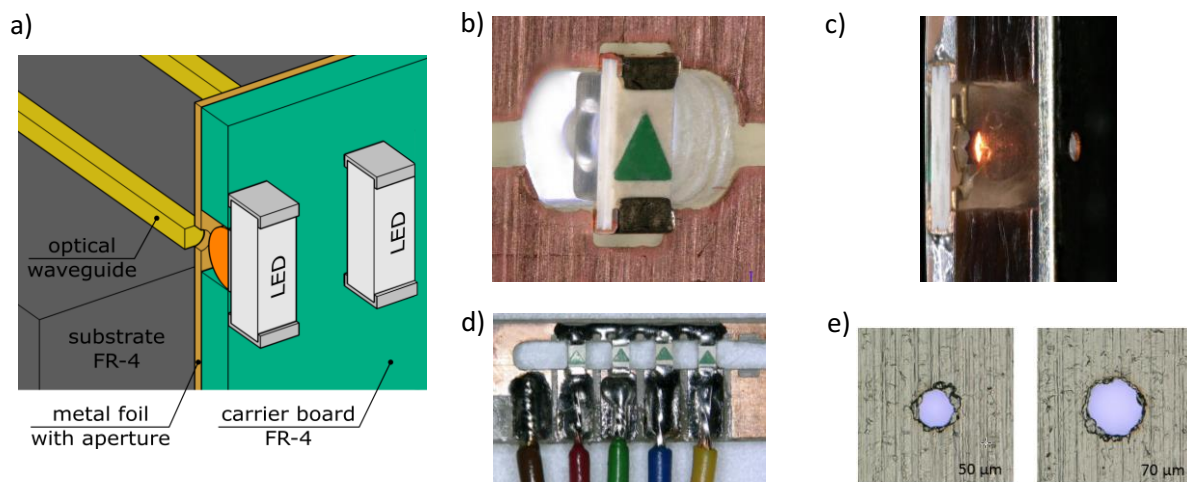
a) Schematic drawing of multiple LED modules coupled to a waveguide array; b) reverse mounted LED in a milled opening of the carrier board with solder pads; c) cross section of an emitting, soldered and glued LED-module aligned to the $\text{\O}50\ \mu\text{m}$ circular aperture in a steel foil; d) LED array with colors red, green, blue, yellow; e) microscope images of laser-cut apertures with diameters of 50 and 70 μm in a 100 μm thick steel foil (production by external company).
